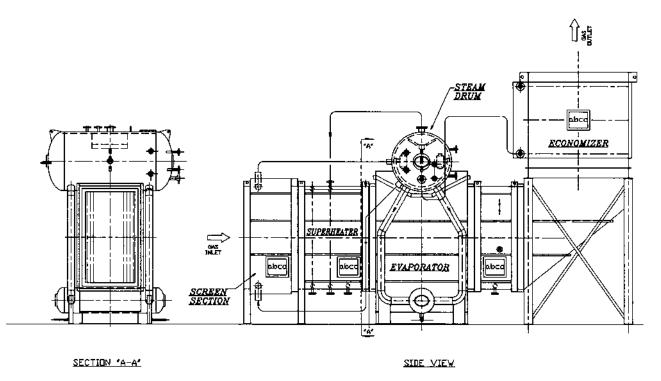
Water tube waste heat boiler with superheater and economizer. (Courtesy of ABCO Industries, Abilene, TX.)
